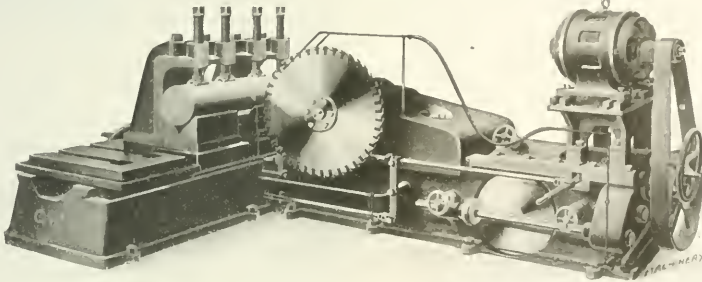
Front View of Q. M. S. Cold Saw shown in Fig. 1
